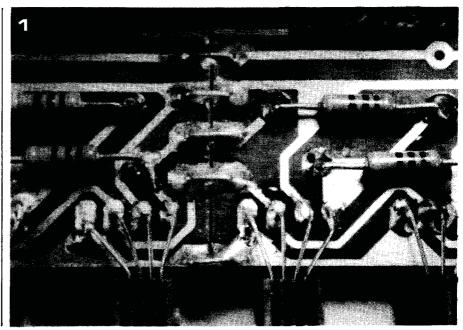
Showing the wiring of the key contacts to the keyboard divider p.c.b.
